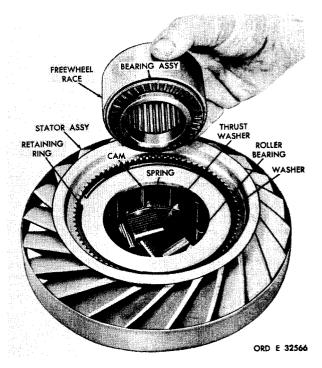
Removing stator freewheel race and thrust bearing assembly from stator
